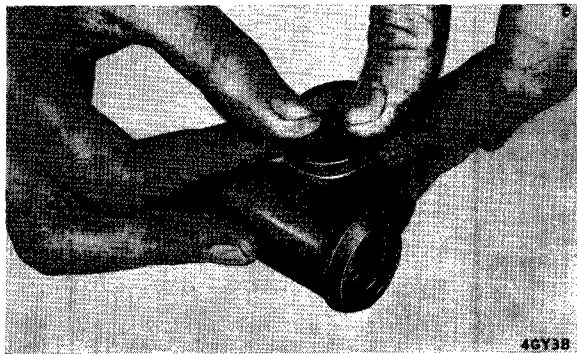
Fitting seals to lower fulcrum nylon bushes
